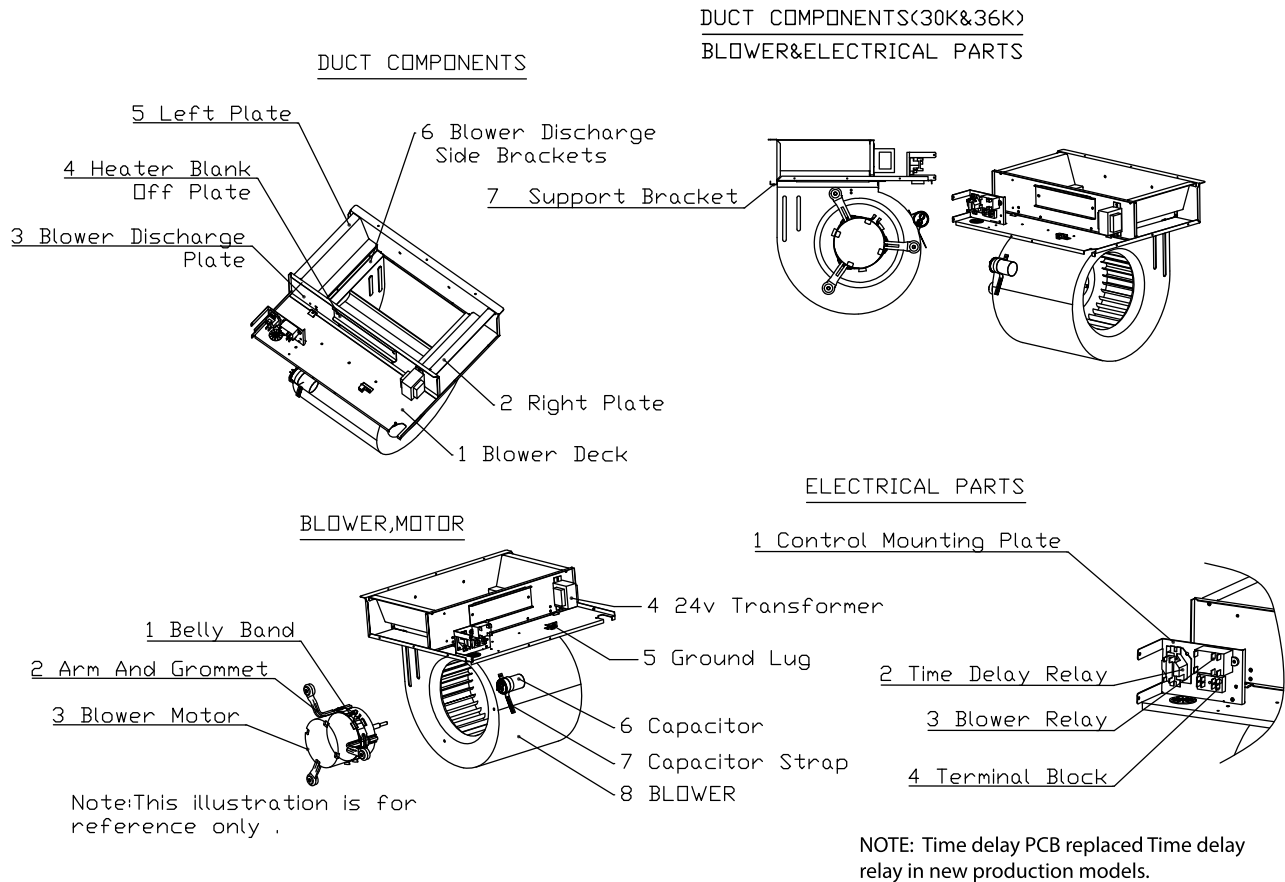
FFMA, FMA4, FMA5 (Sizes 30 & 36) Expanded View - Duct Components, Blower & Electrical Parts
